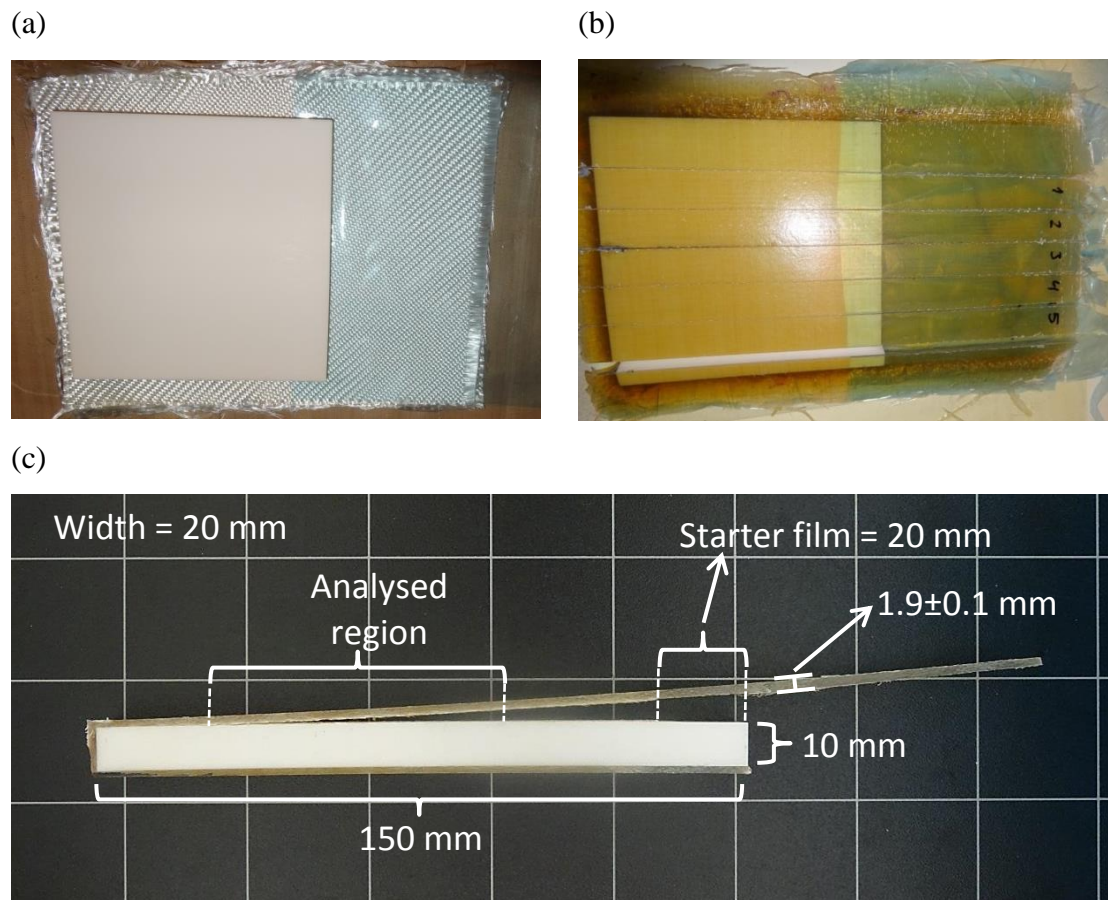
Peel test specimen fabrication: (a) Lay-up of alumina, fluoropolymer film and alumina tile, and (b) five numbered specimens cut from consolidated alumina/composite panel. (c) Illustration of a tested peel test specimen with the dimensions indicated.
